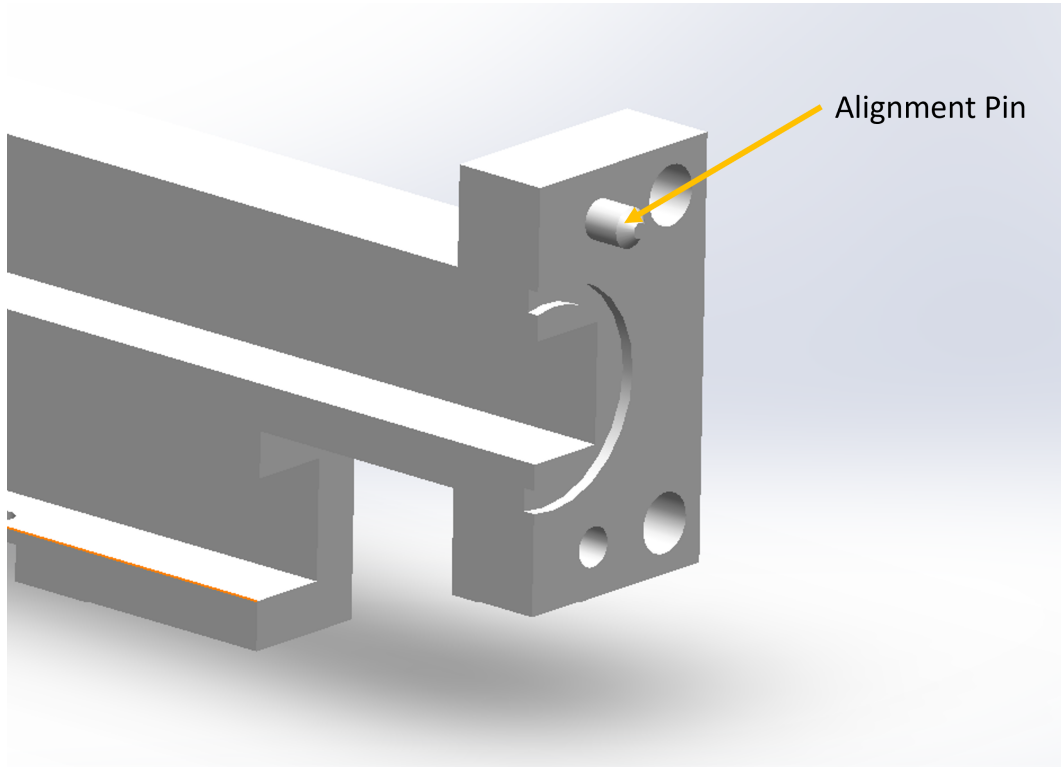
A cross-section of the flange designed for the scaled and 3D printed directional couplers. This flange features an O-ring groove and alignment pins.
